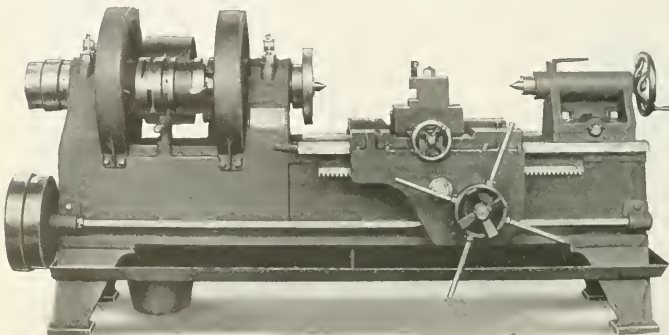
Johnston & Jennings 20-inch Manufacturing Lathe built with 8- or 10-foot Bed
